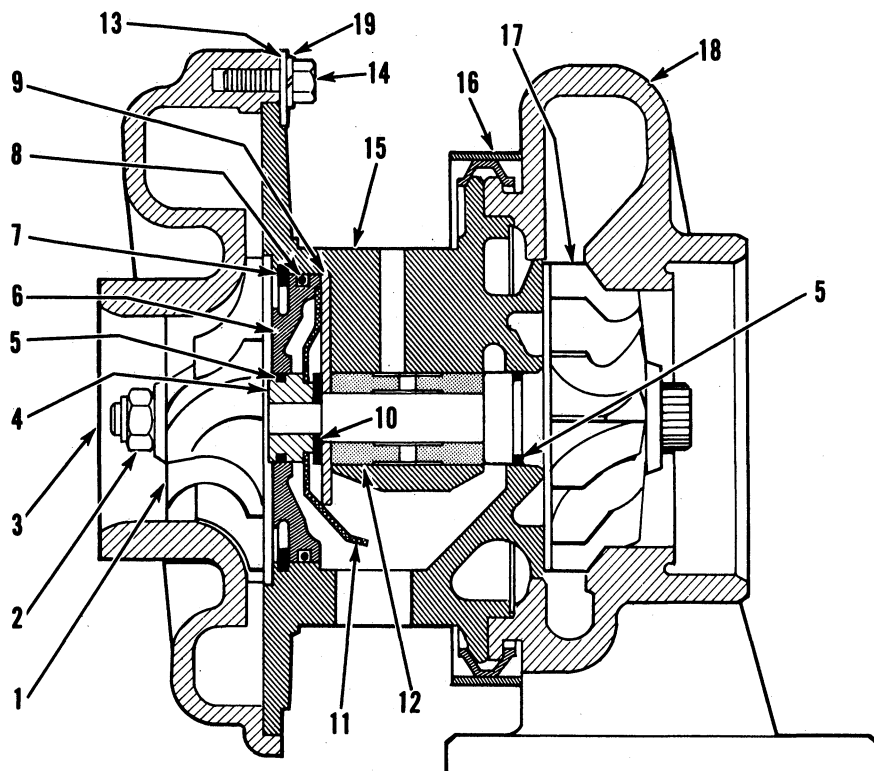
Cross-sectional view of Schwitzer 3LM turbocharger showing component parts. Refer to Fig. 66 legend for parts identification.
